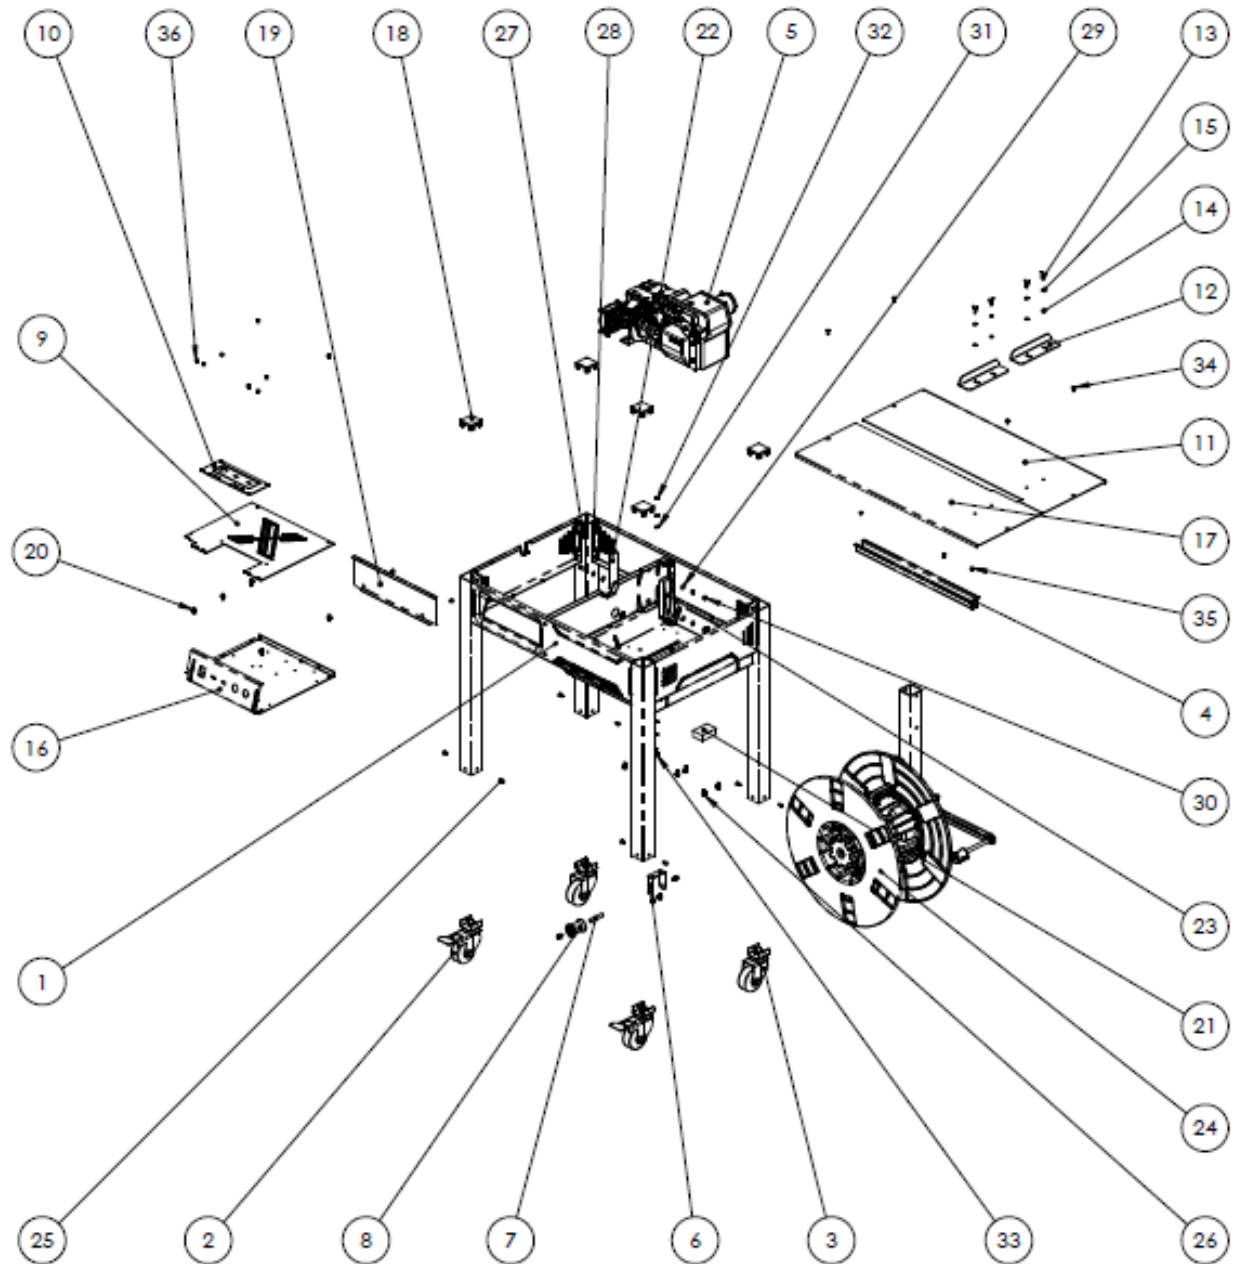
Heater Plate Unit 5030545/P02-0394500
